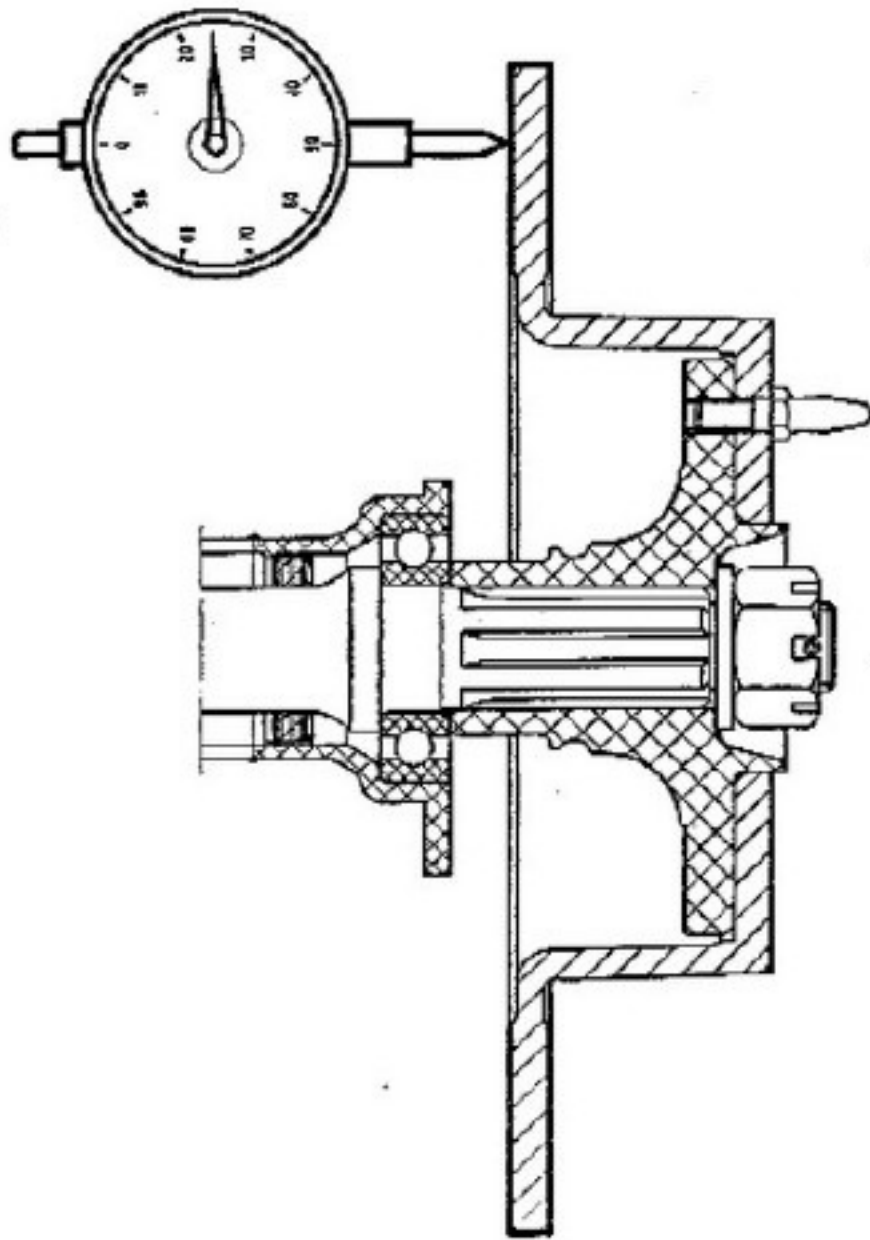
Checking brake disc run-out with a centesimal dial gauge.
